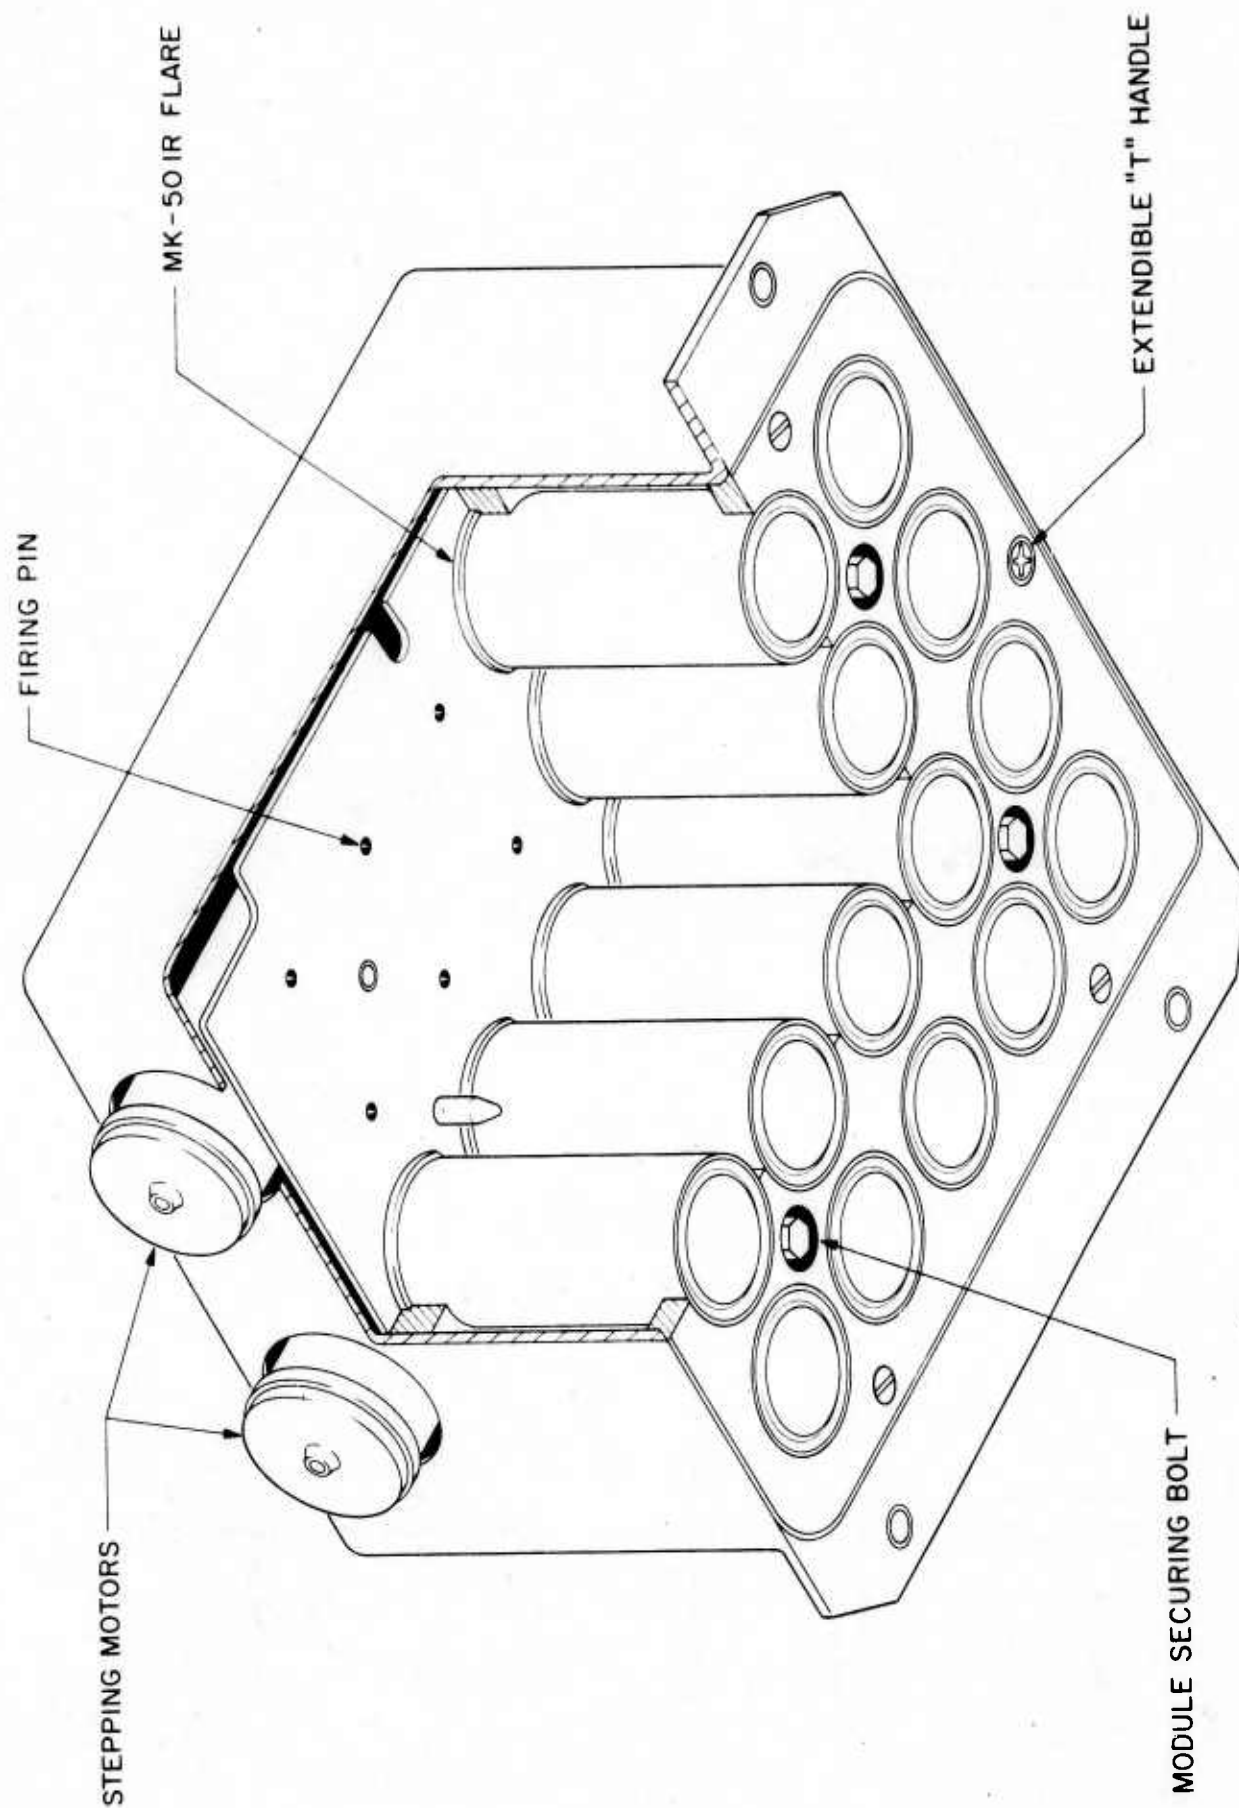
DISPENSER ASSEMBLY (ELECTROMECHANICAL FLARE INITIATION)
